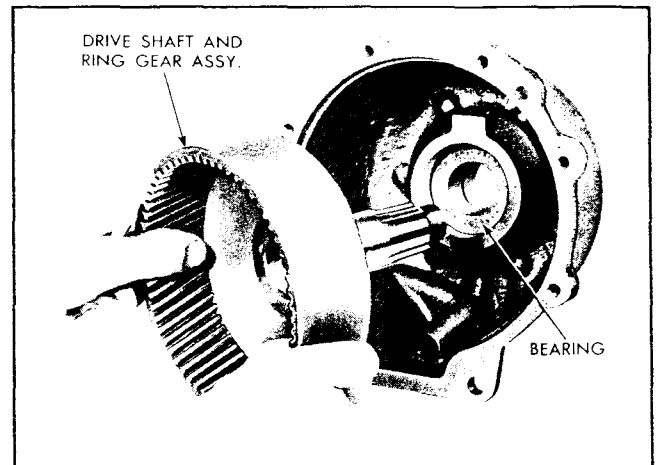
Installing Reduction Gear Drive Shaft and Ring Gear Assembly in Gear Housing (2.1:1 Ratio)
